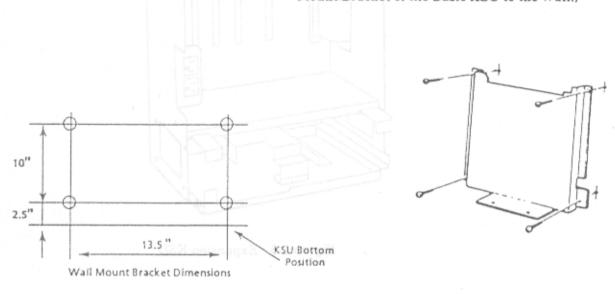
Attaching the Wall Mount Bracket of the Basic KSU to the Wall
